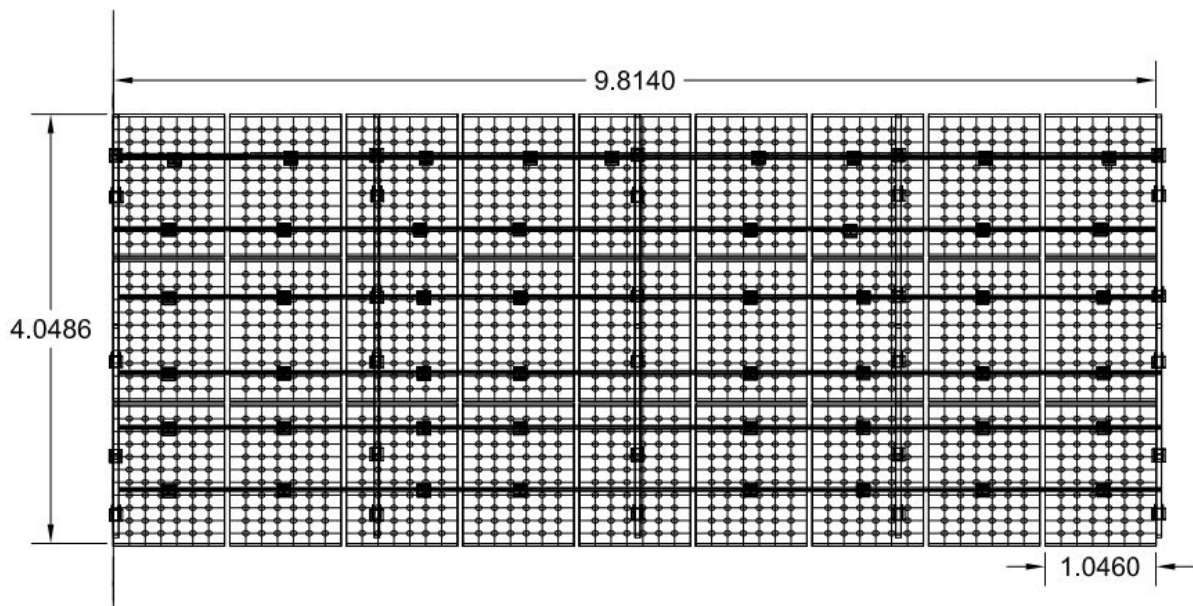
Top view of solar panel frame with dimensions and number of panels.
